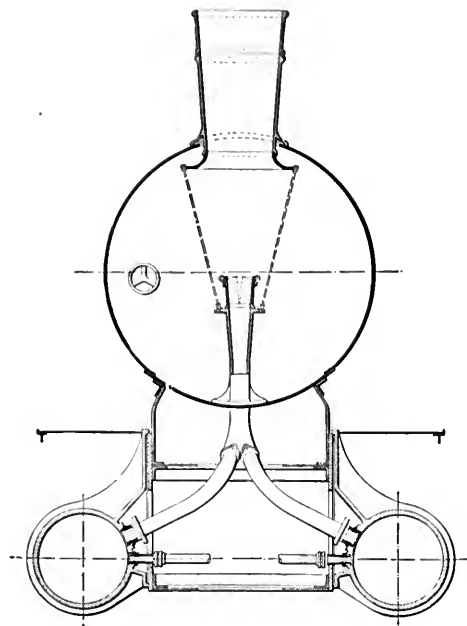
NUMBER OF EXHAUST PORTS REDUCED AND LARGE-DIAMETER EXHAUST BELT DISPENSED WITH IN NON-CONDENSING ENGINE
